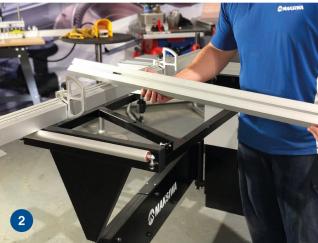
and 2: Fit the wood panel stopper on the aluminum tab and tighten the handles.
